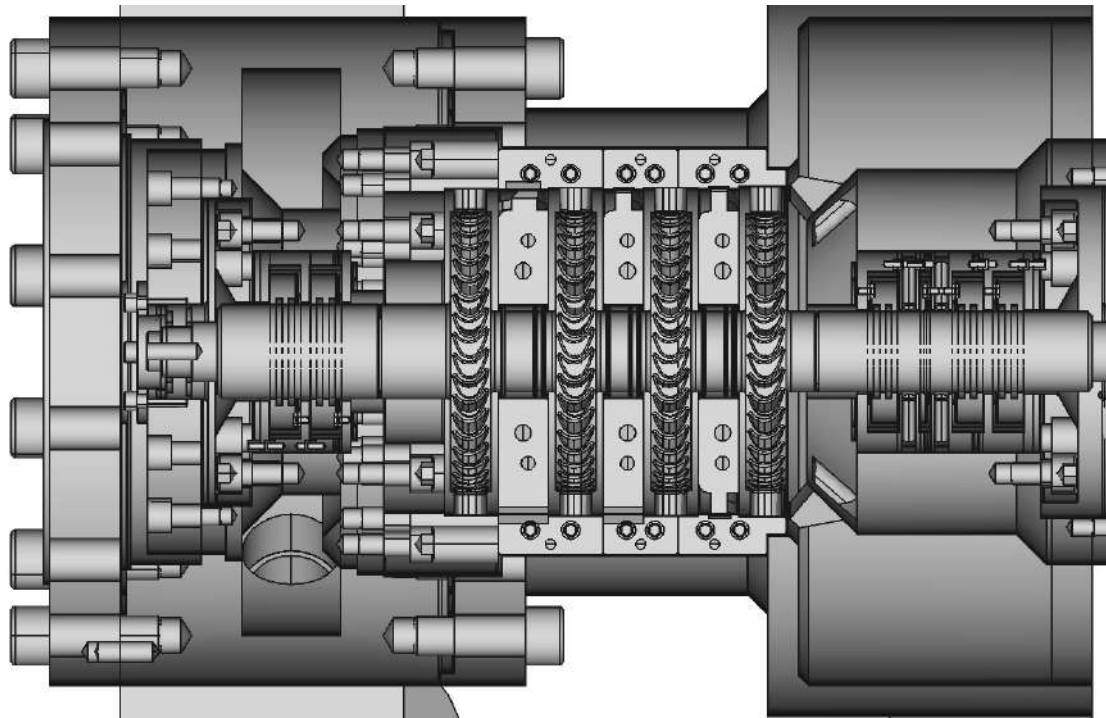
Cut of propane turbine provided by the manufacturer M+M TURBINE-TECHNIK [7]
